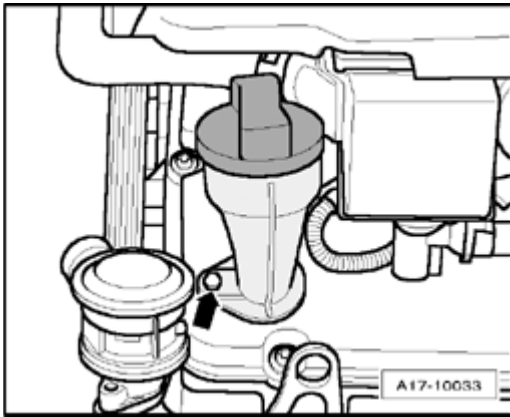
Oil Filler Tube At Cylinder Head Cover
